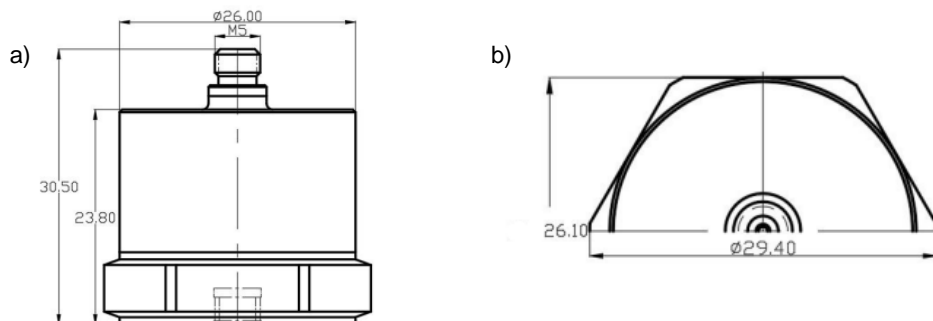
Mechanical dimension SSA-P9UCB7 a) side view b) top view
